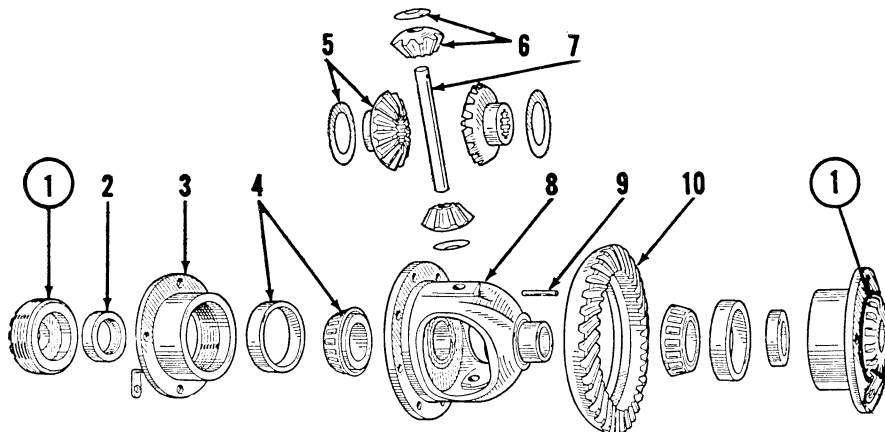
Pony differential assembly. Bevel ring gear is retained to differential case by cap screws. Adjusting nuts (1) control preload on differential bearings and backlash (.006-.008) of main drive bevel gears.
